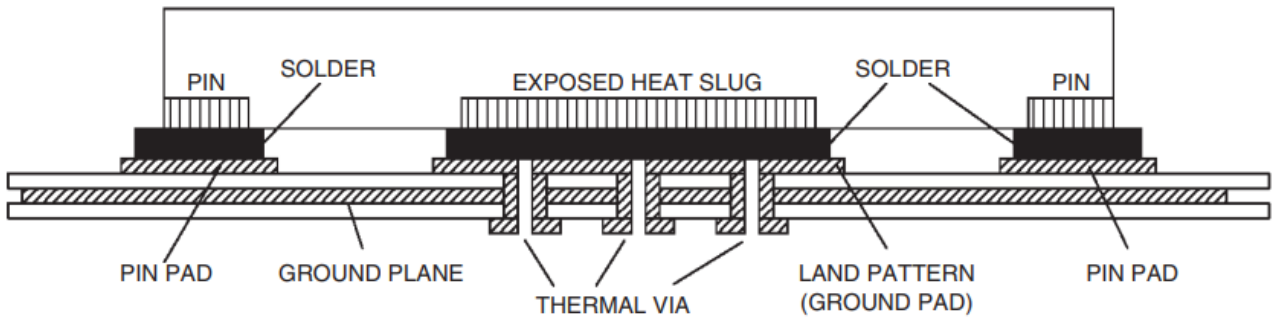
PCB Assembly for Exposed Pad Thermal Release Path – Side View
